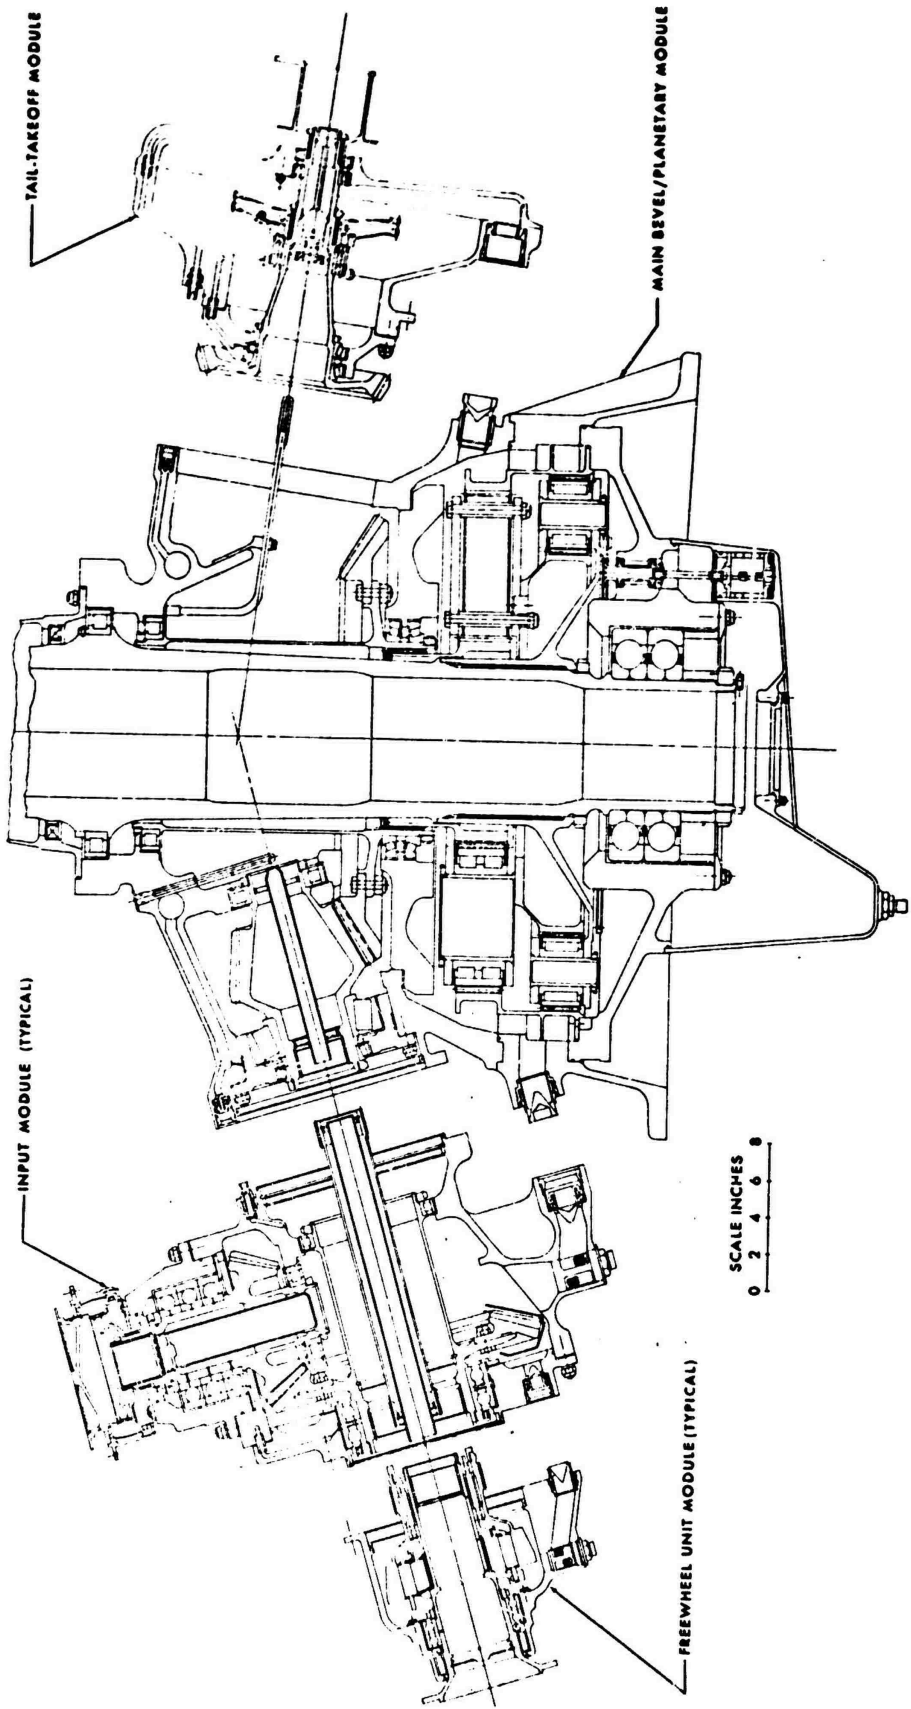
Exploded Cross Section of CH-54B Main Transmission, Six-Module Configuration.
